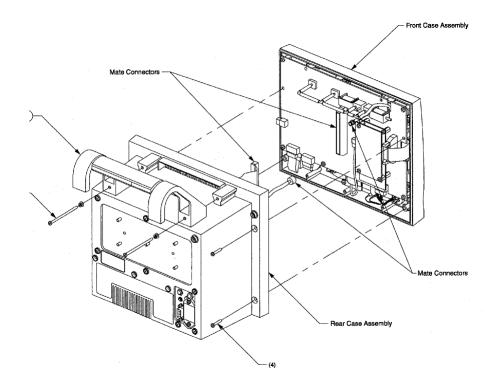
A1 Top Level Assembly Drawing (2 of 2)
